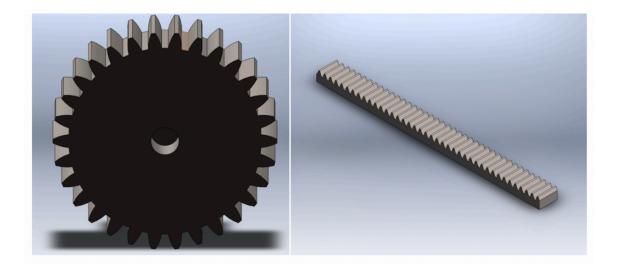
PINION GEAR (LEFT) & RACK GEAR (RIGHT)
